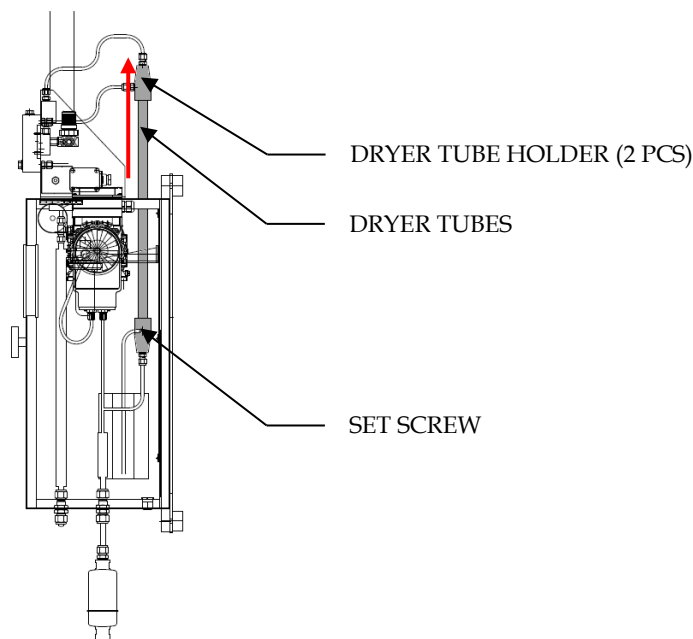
ShipCEMS sample gas dryer (dryer tubes)
